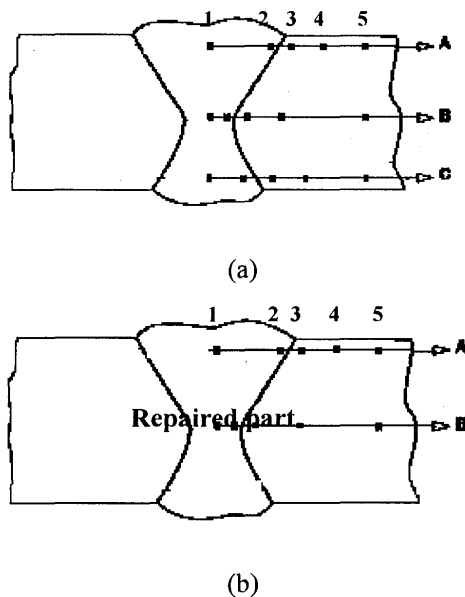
Location of hardness measurements for (a) original weld and (b) different repair welding techniques
